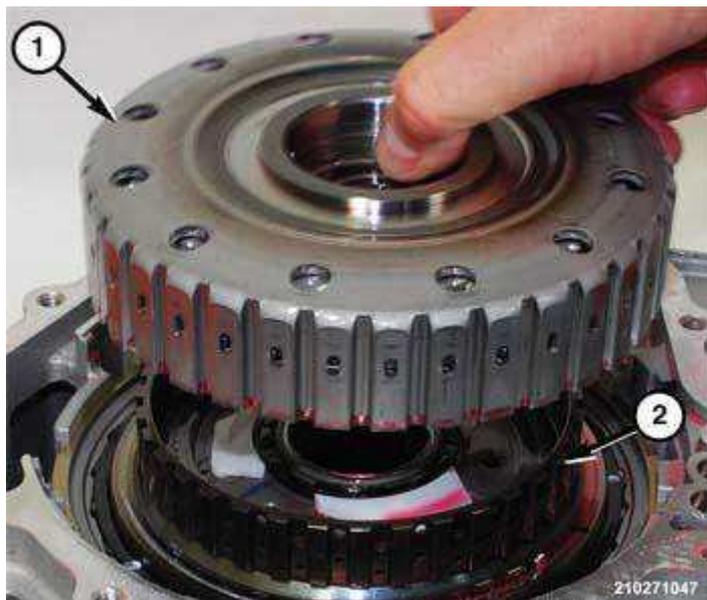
Overdrive Clutch Assembly & One Way Clutch
